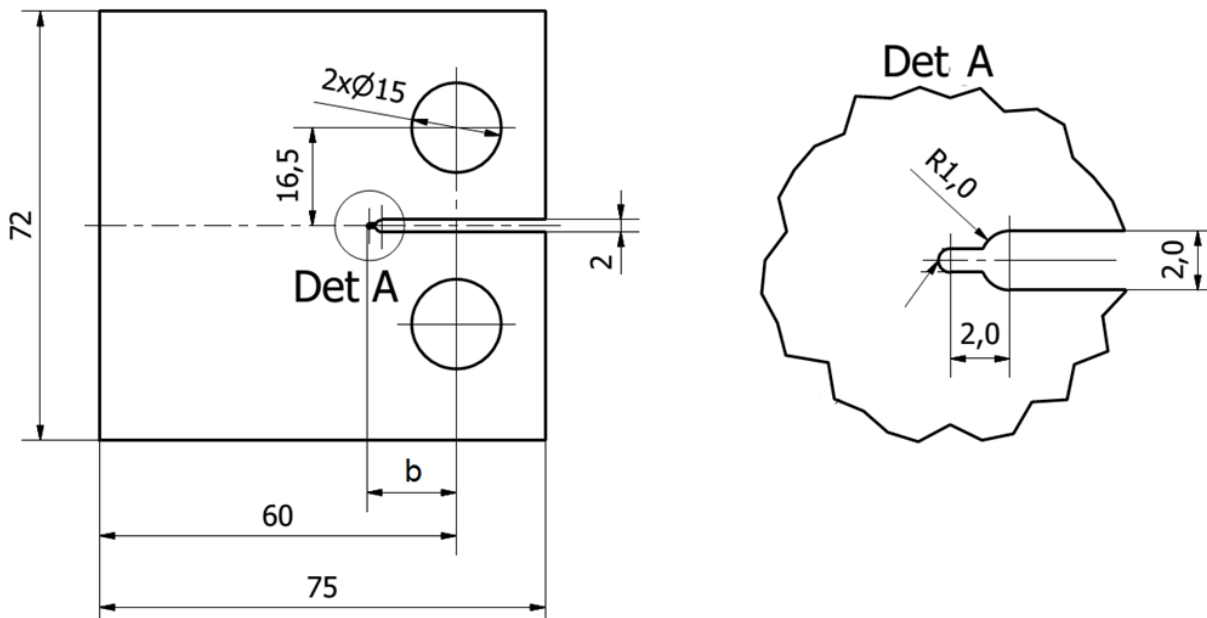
Dimensions of the modified C(T) specimen used for fatigue limit assessing.
